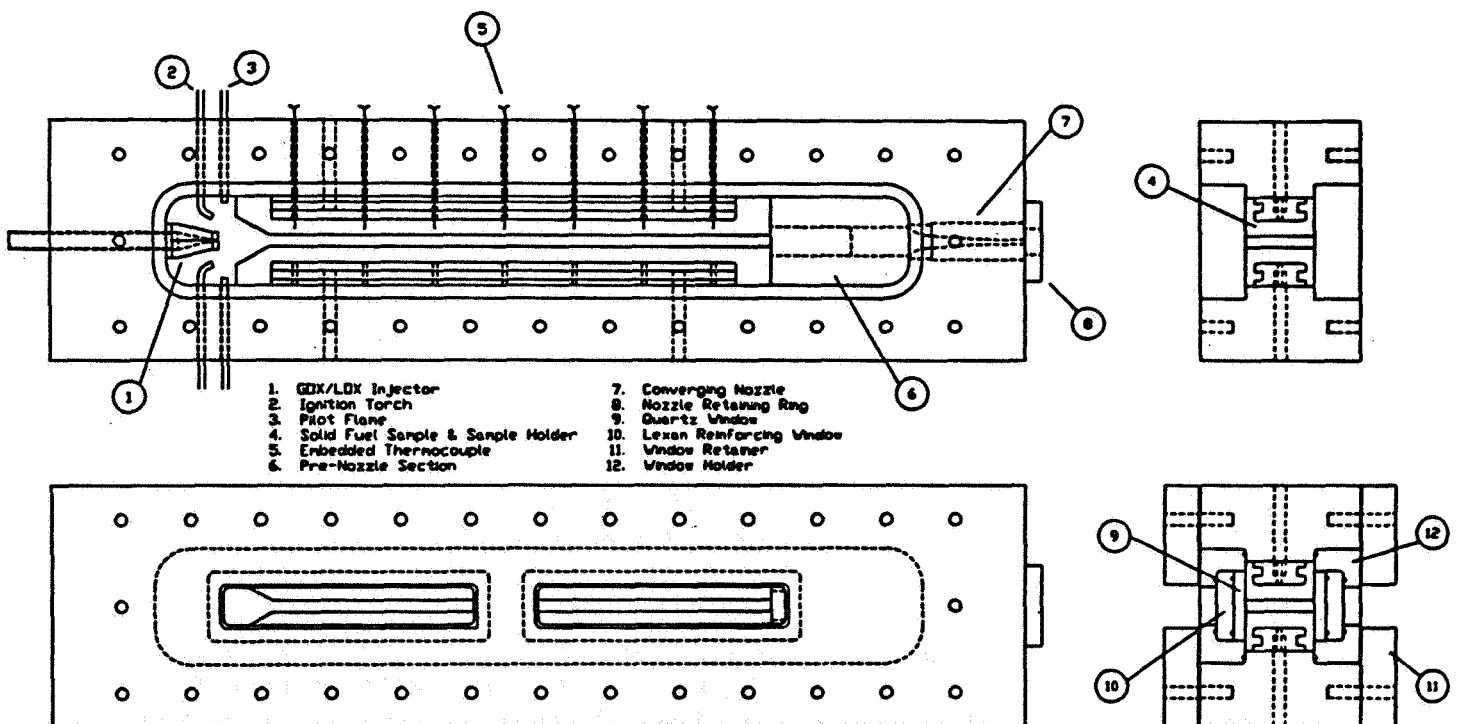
Partial Assembly Drawing of Hybrid Test Chamber
